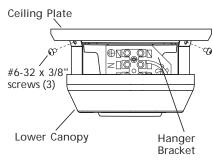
Attaching Lower Canopy and Hanger Bracket to Ceiling Plate
